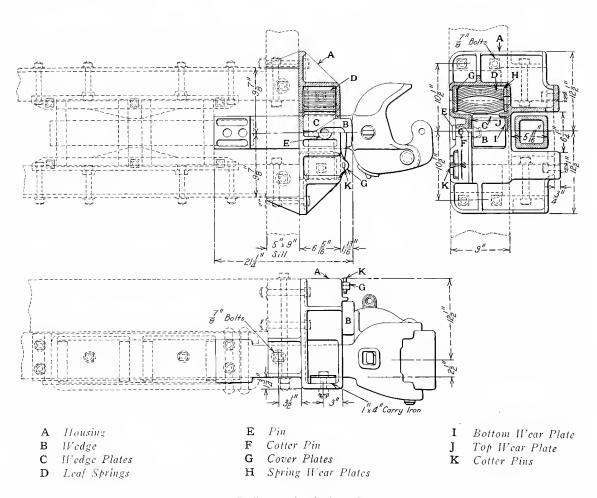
Gould Friction Striking Plate Buffer as Applied to Chicago, Milwaukee & St. Paul Box Cars.
